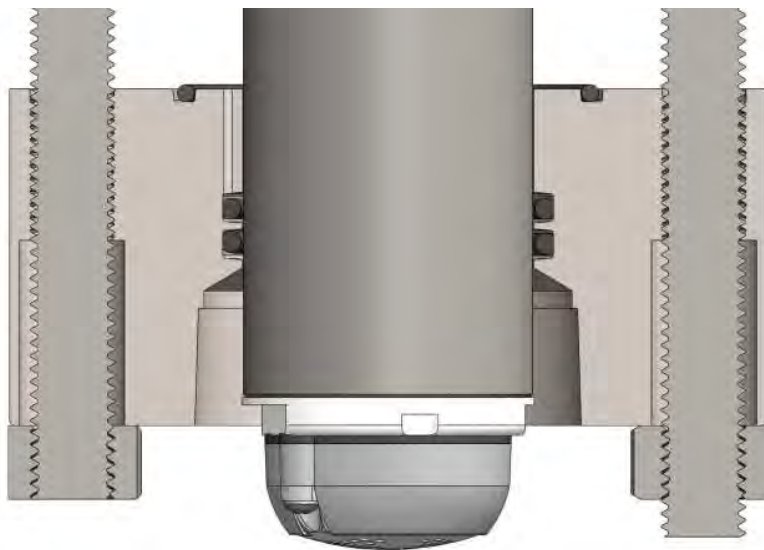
Cross-Section of Cap with sensor end pushed passed both internal O-rings.
